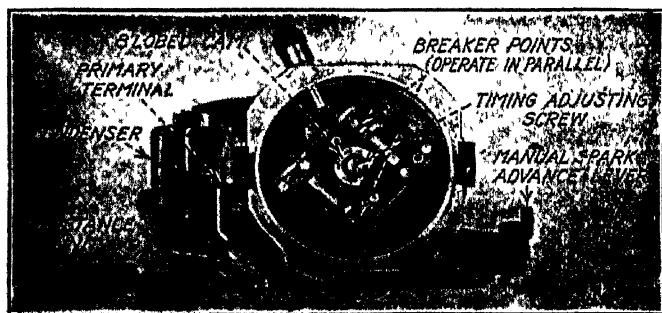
Delco breaker mechanism used on Cadillac Eight.
